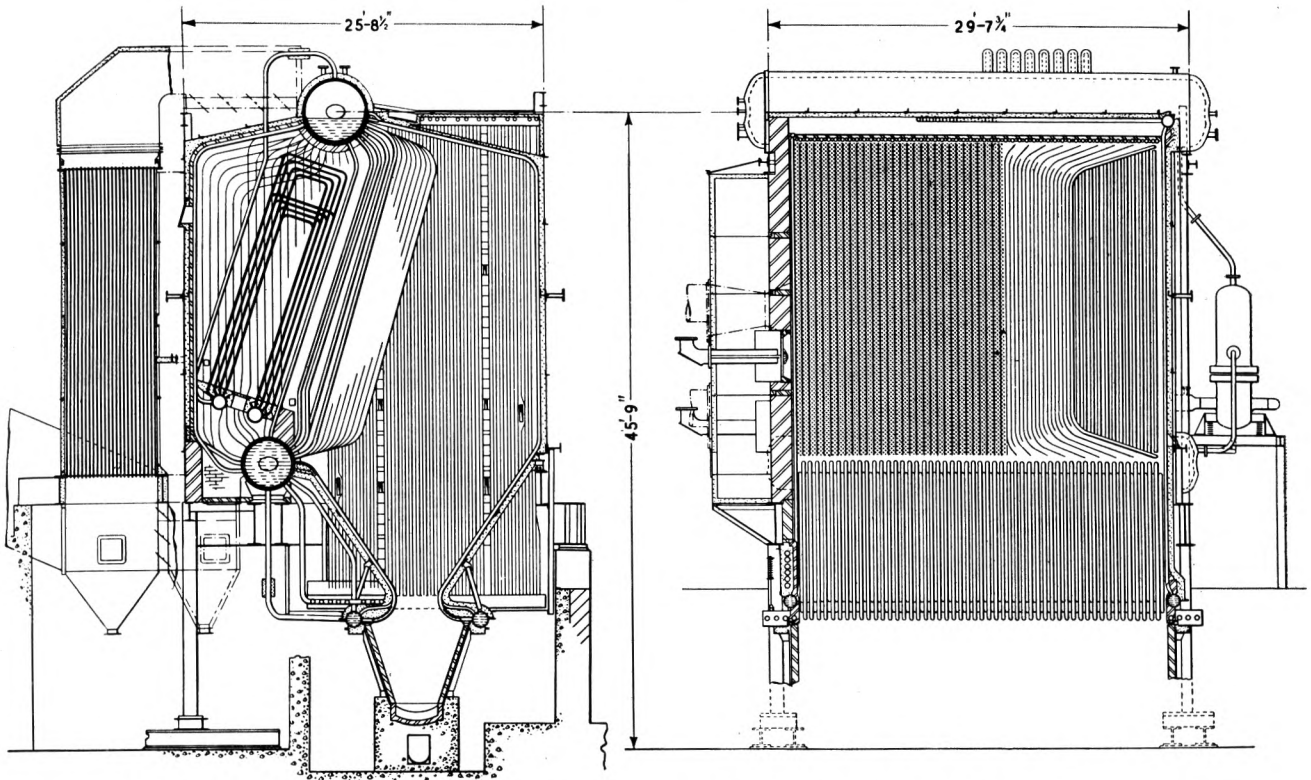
INTEGRAL-FURNACE BOILER FOR FIRING WITH PULVERIZED COAL AND BLAST-FURNACE GAS; YOUNGSTOWN SHEET AND TUBE COMPANY
